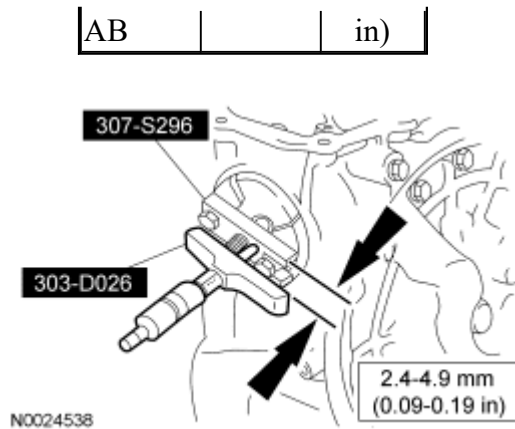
Measuring Dimension To Bar Of Special Tool With Specification
